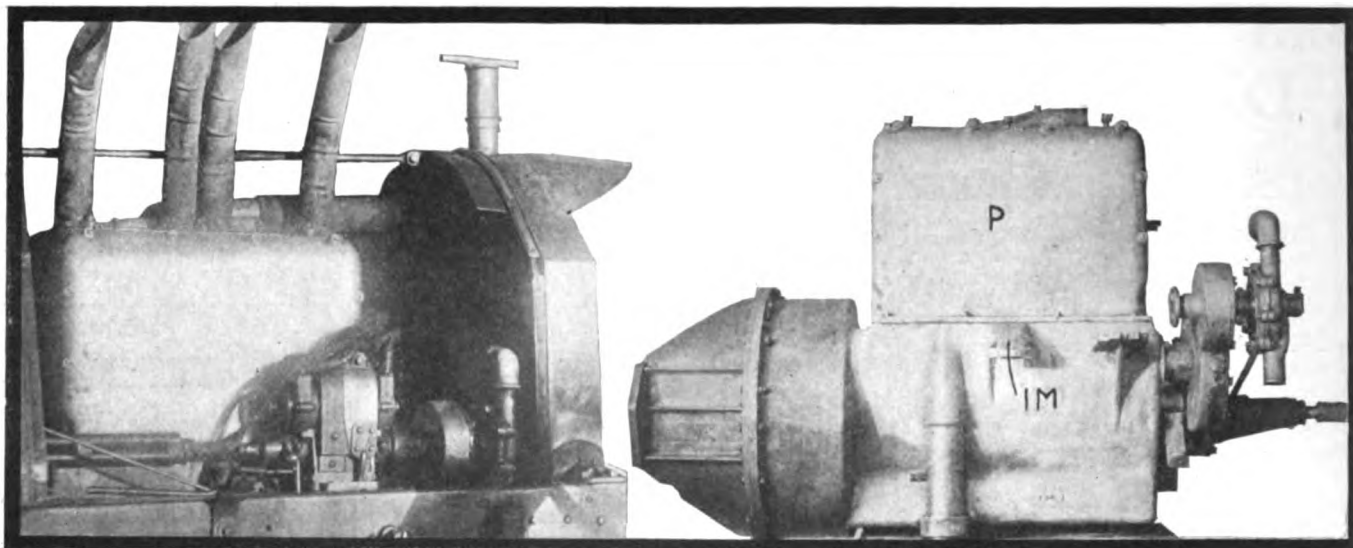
Right side of Duesenberg-Mason motor showing external exhaust pipes and large cover plate which conceals valve mechanism, as shown in Fig. 5
